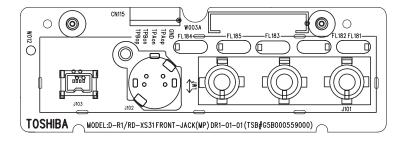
EU55 Front (Jack) PC Board (Top side)
